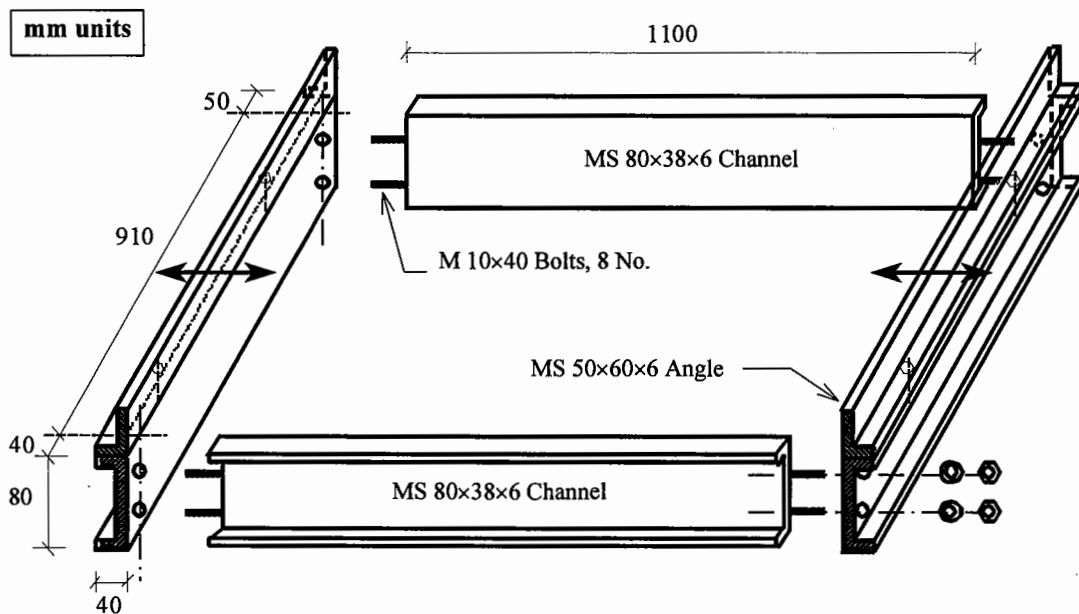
Rigid (steel) frame assembly used for holding a CBM slab during testing
